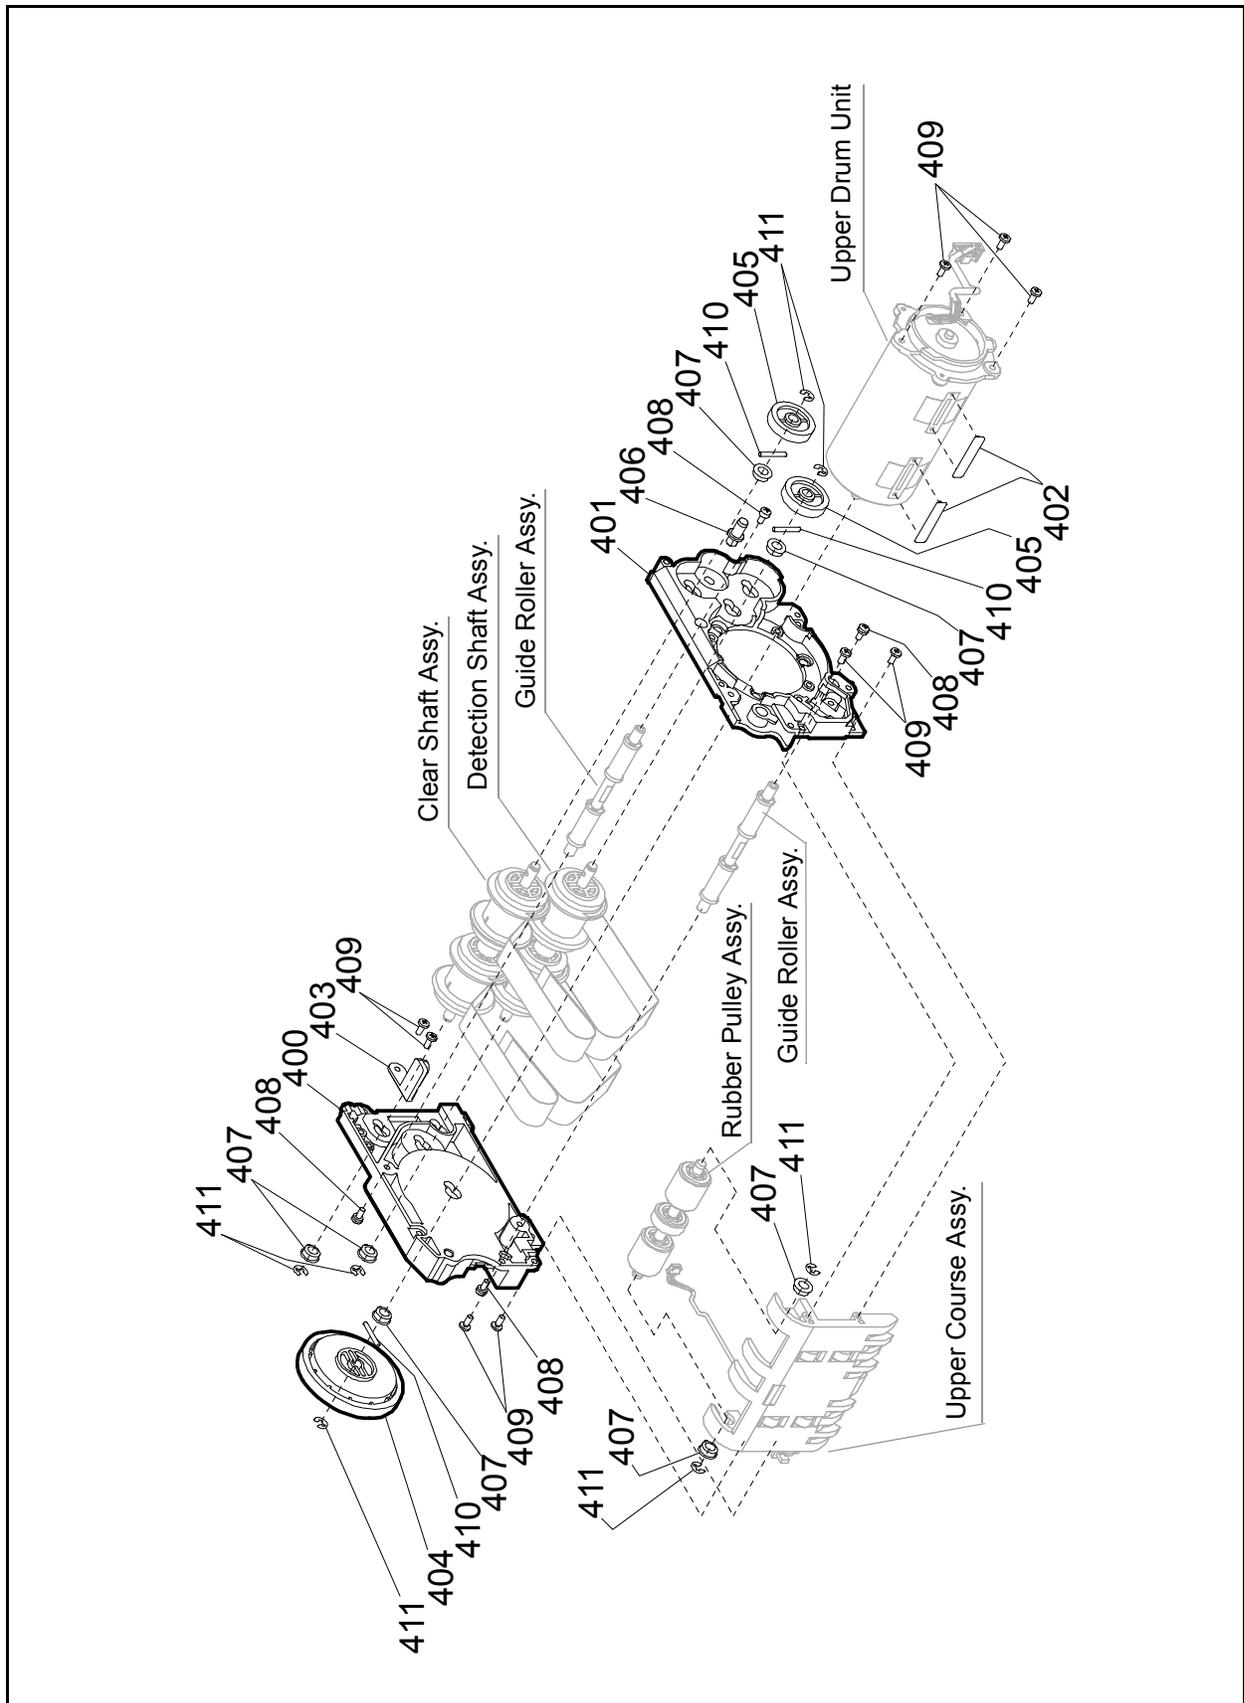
VEGA-RC Twin Upper Unit Exploded View
